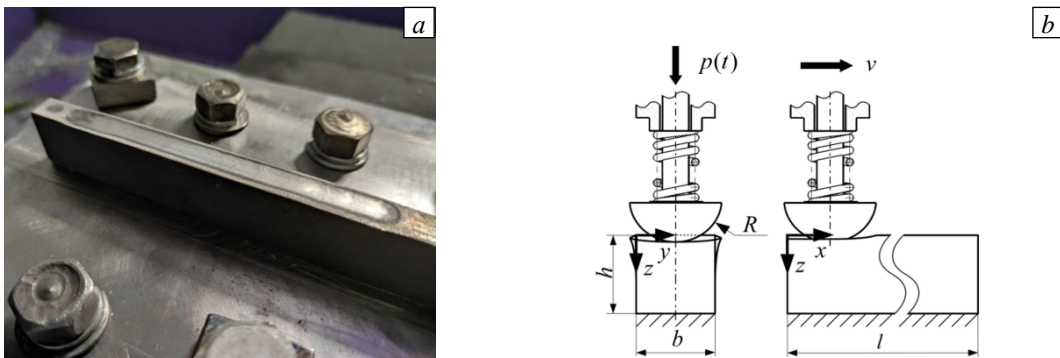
Control specimen forged with a pneumatic hammer, (a) and the forging process scheme (b).
